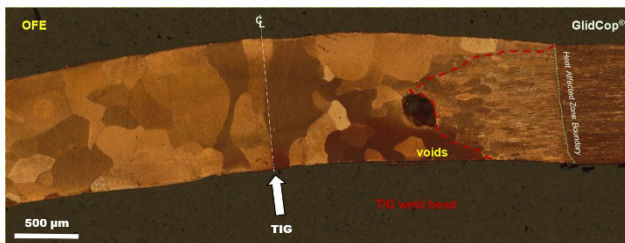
TIG weld of OFE to GlidCop®.
